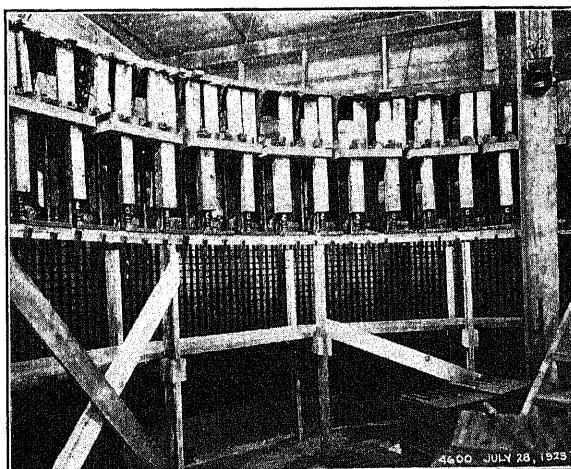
STATOR CORE ASSEMBLING AND PRESSING DEVICE
